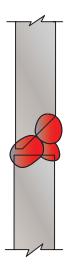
Weld position for a horizontal joint.
